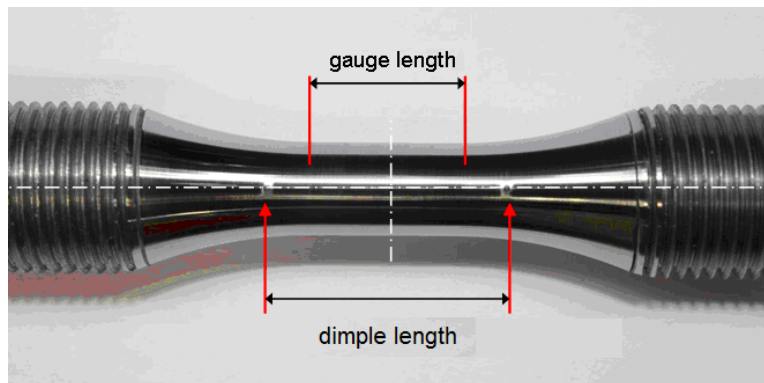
Picture of the specimen with two dimples at 1" (25.4mm) distance
